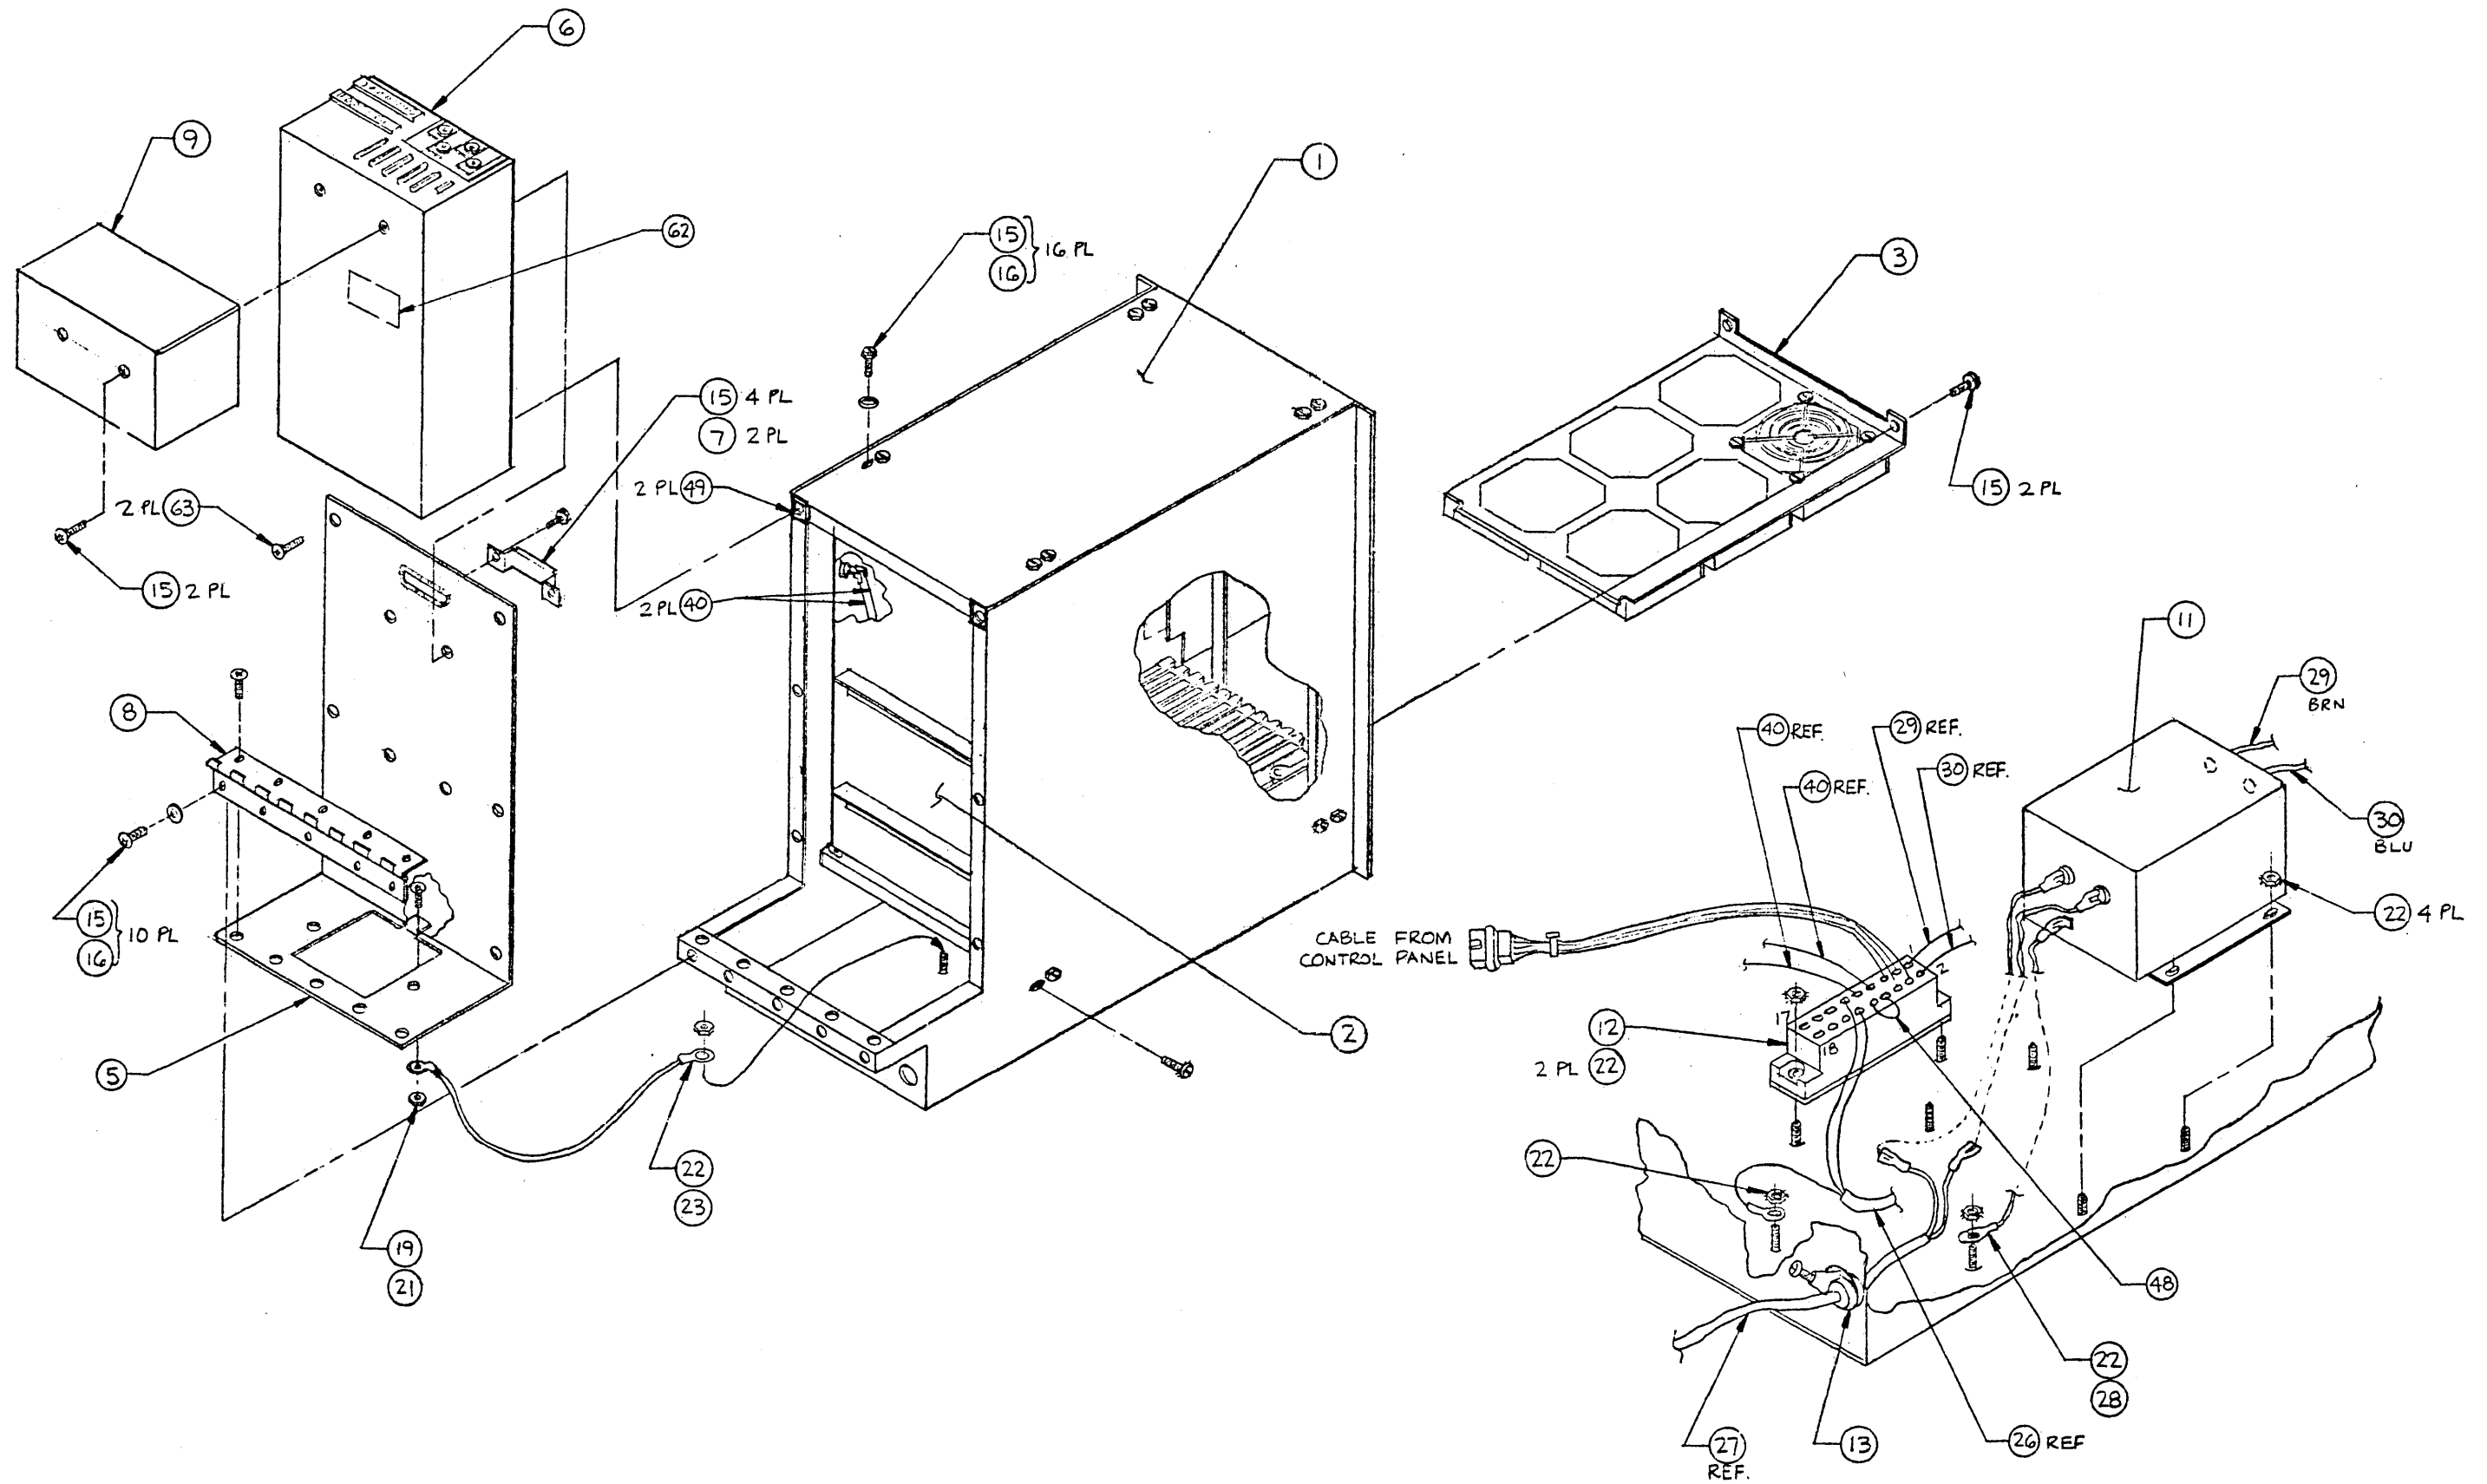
Final Assembly, Chassis, Sheet 1 of 3
